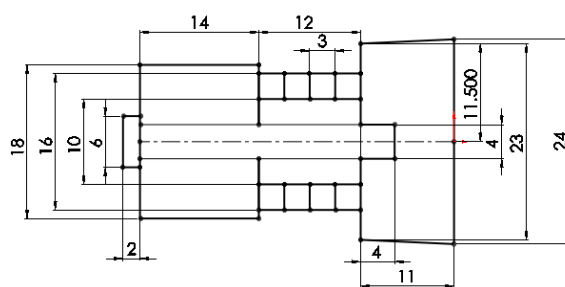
Dimensions of the designed Tonpiliz transducer in millimeters
